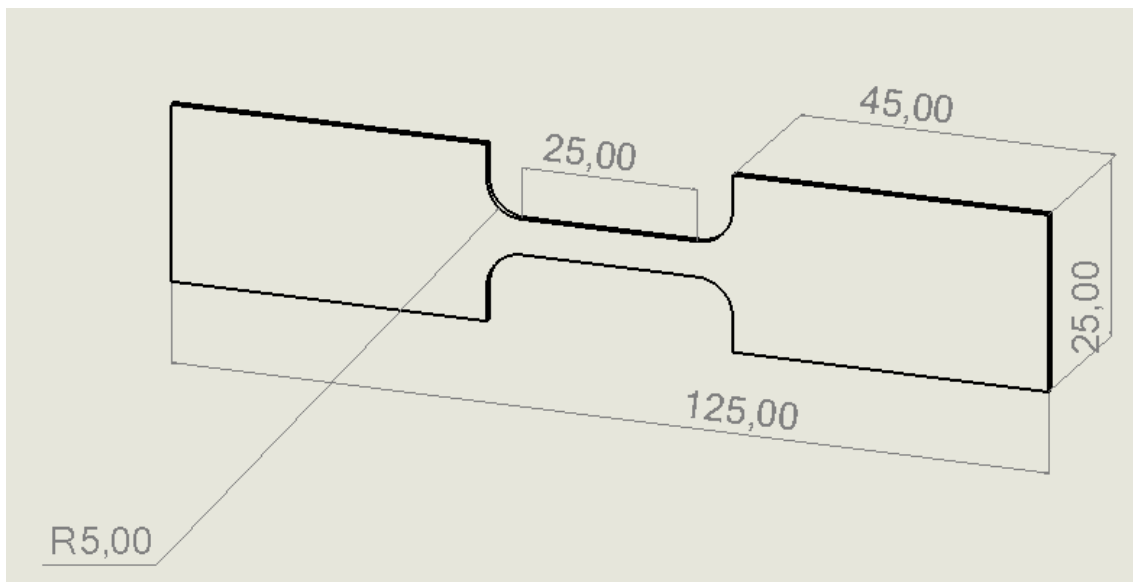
Standard tensile test specimen dimensions for Armor Steel-1 and Armor Steel-2
